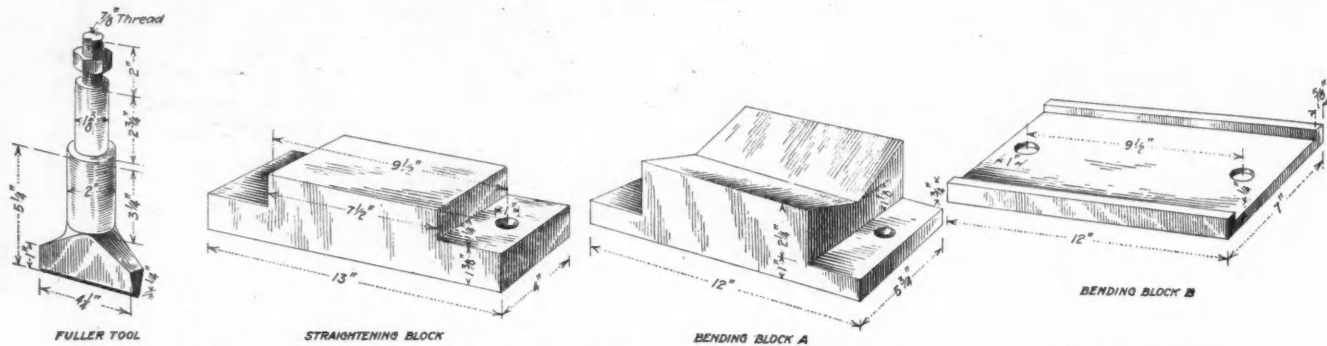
TOOLS USED FOR BENDING END AND BOTTOM-SIDE PLATES WITH POWER SHEARS EMPLOYED
